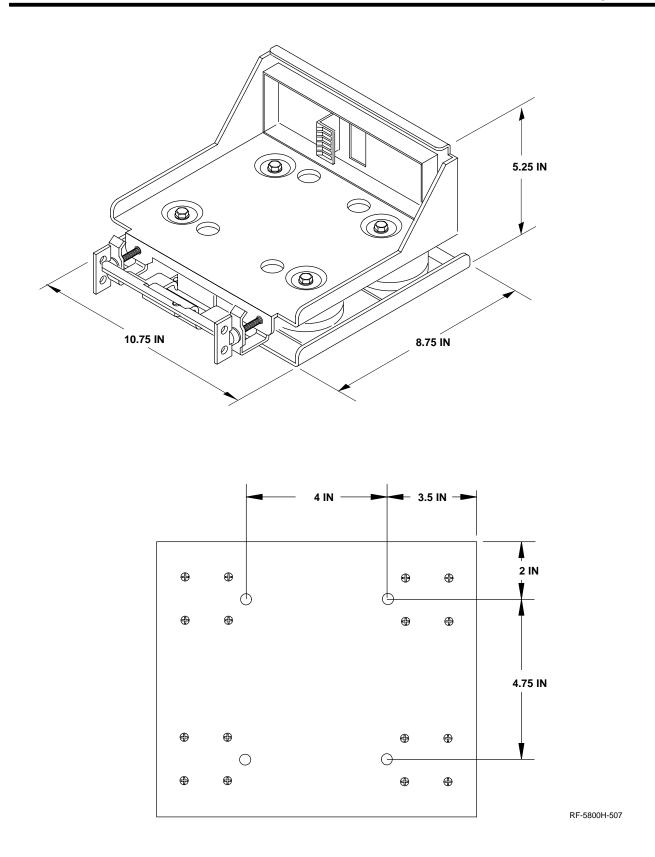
RF-5211-01VSM Shock Mount Dimensions
